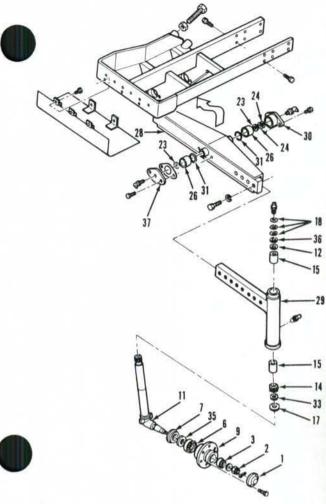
Exploded view of adjustable front axle assembly used on 1710 Offset tractors. Refer to Fig. 3 for legend except for the following:
